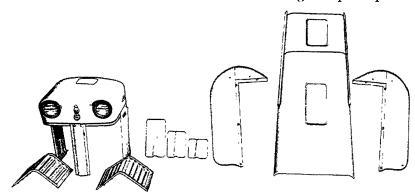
Sheet Metal Removed "500B" and "600B"
